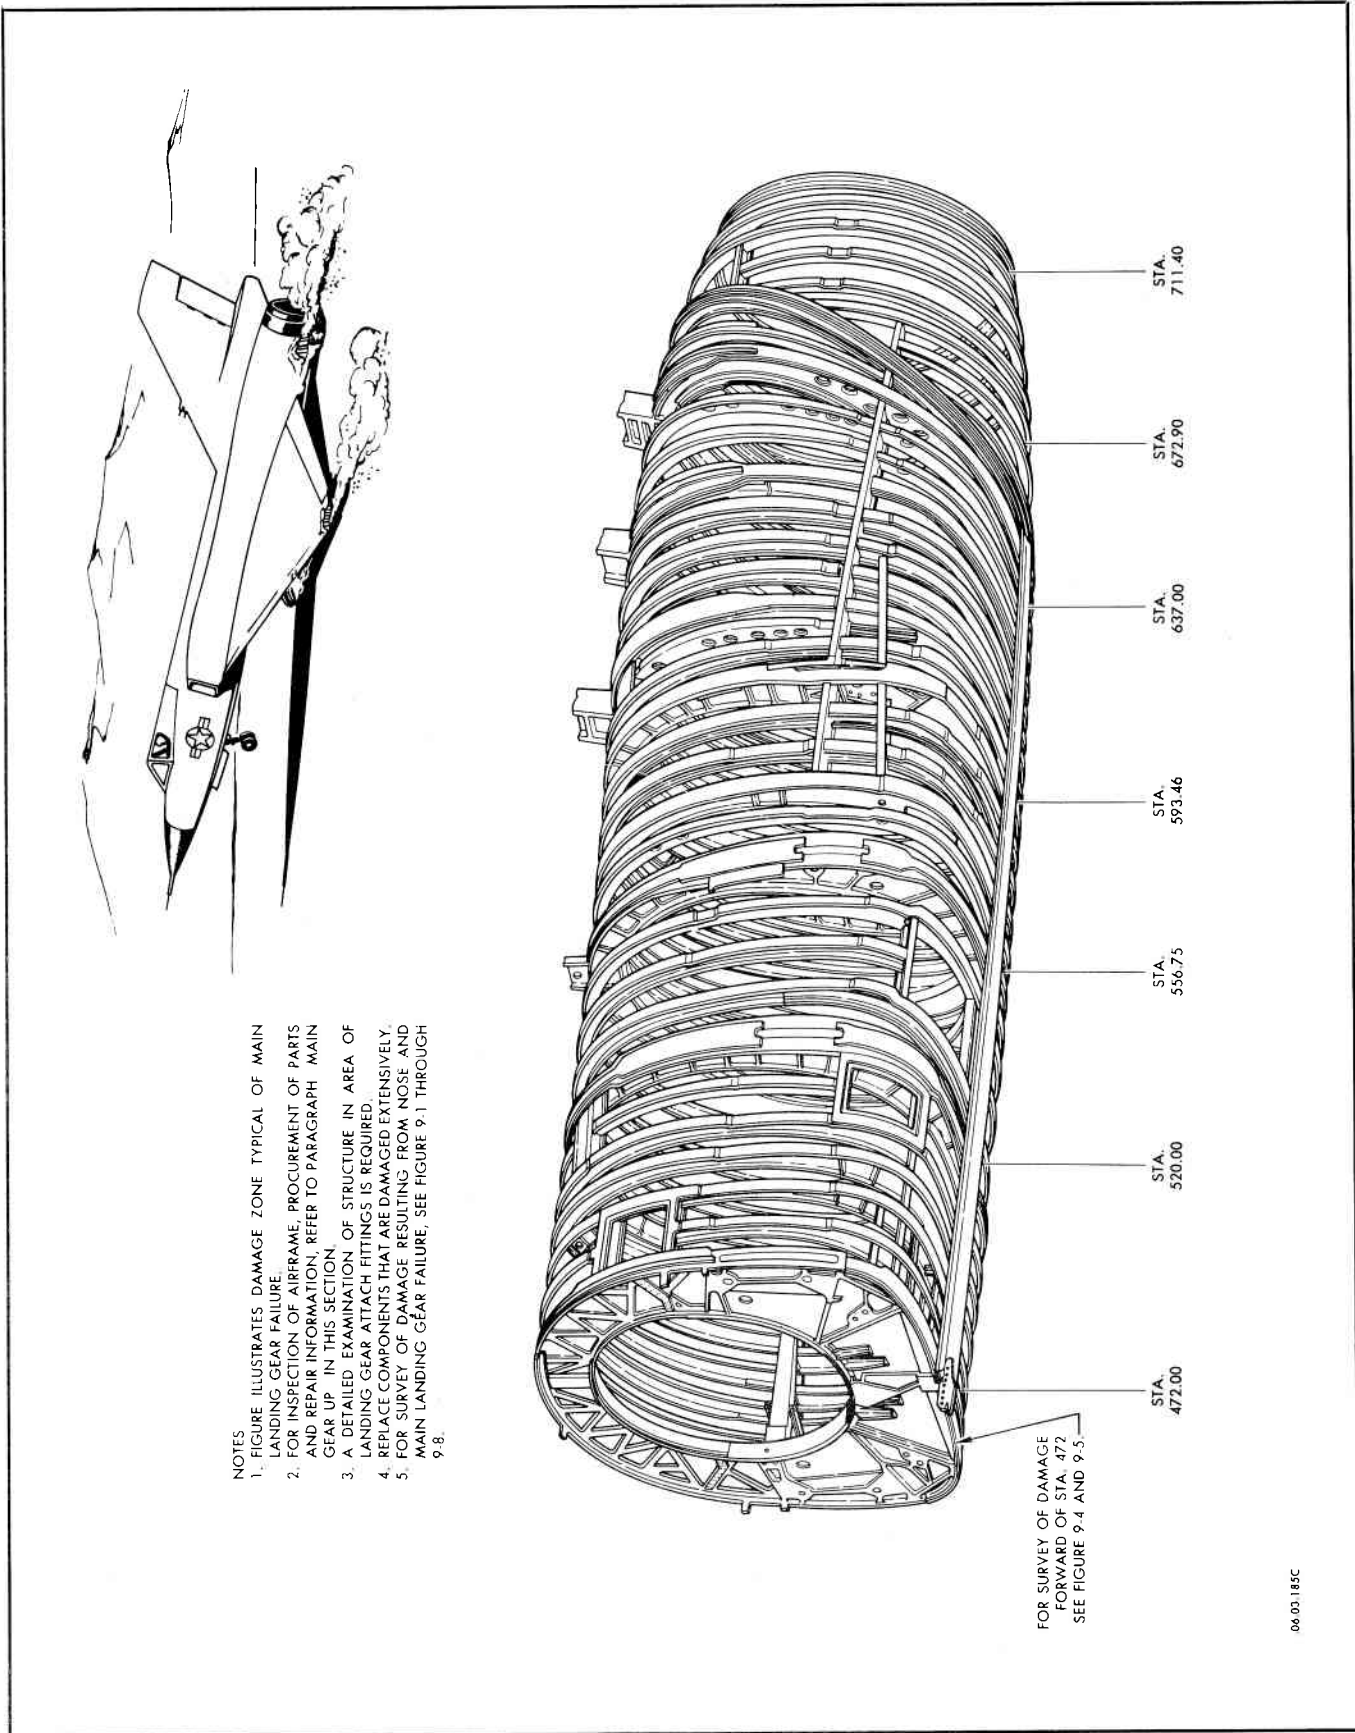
Damage Due to Landing Gear Failure — All Gear Up, F-106B
